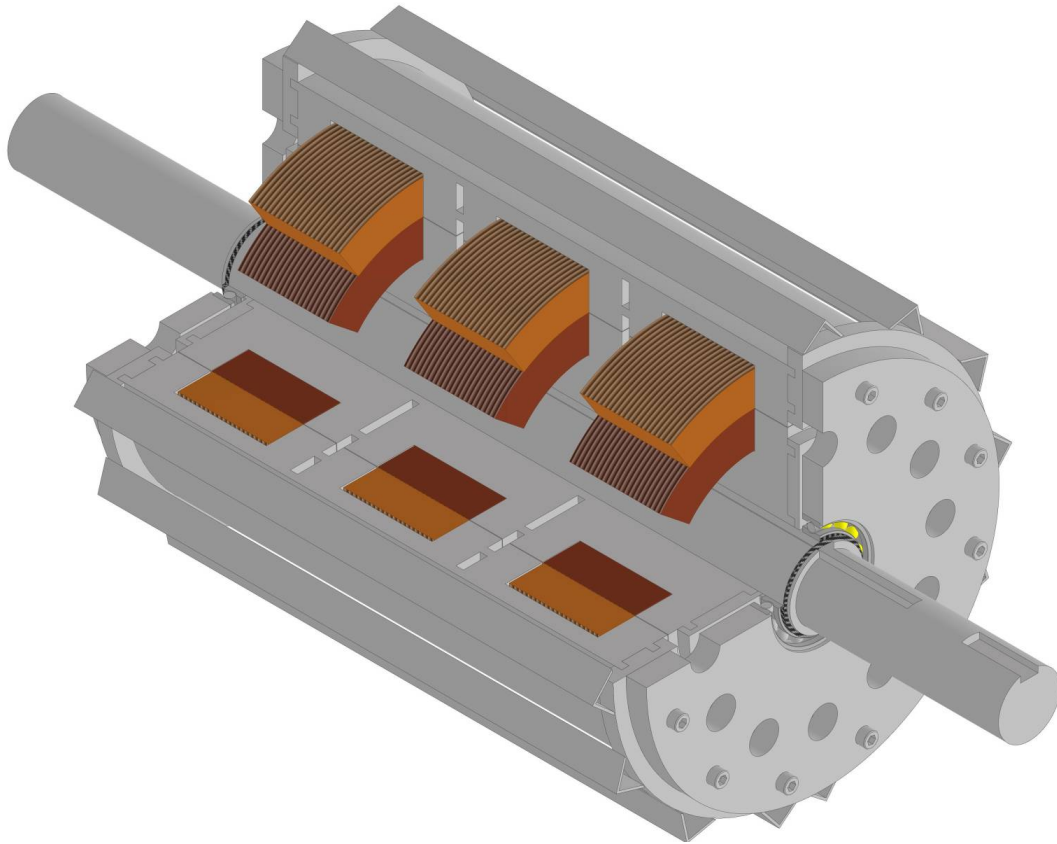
Cross-sectional view of the complete three-phase RT assembly
